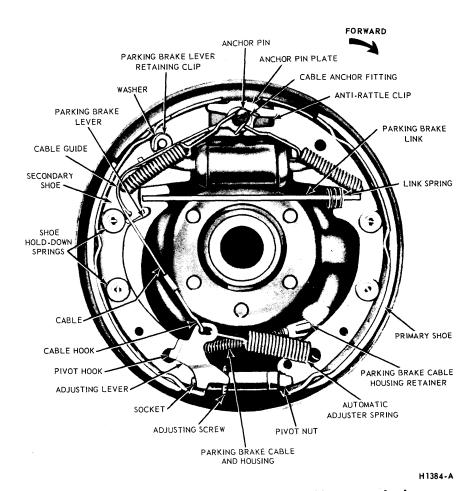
Thunderbird Self Adjusting Brake Assembly—Rear Wheel
